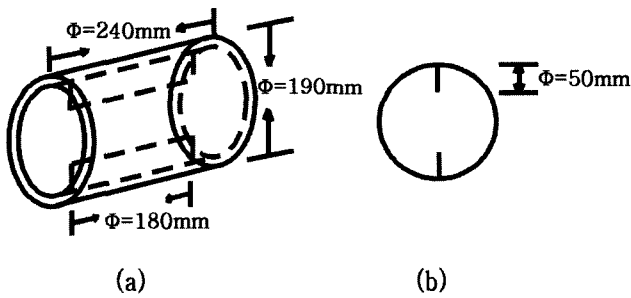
Ballmill with two blades inside; (a) perspective view (b) cross-sectional view.
